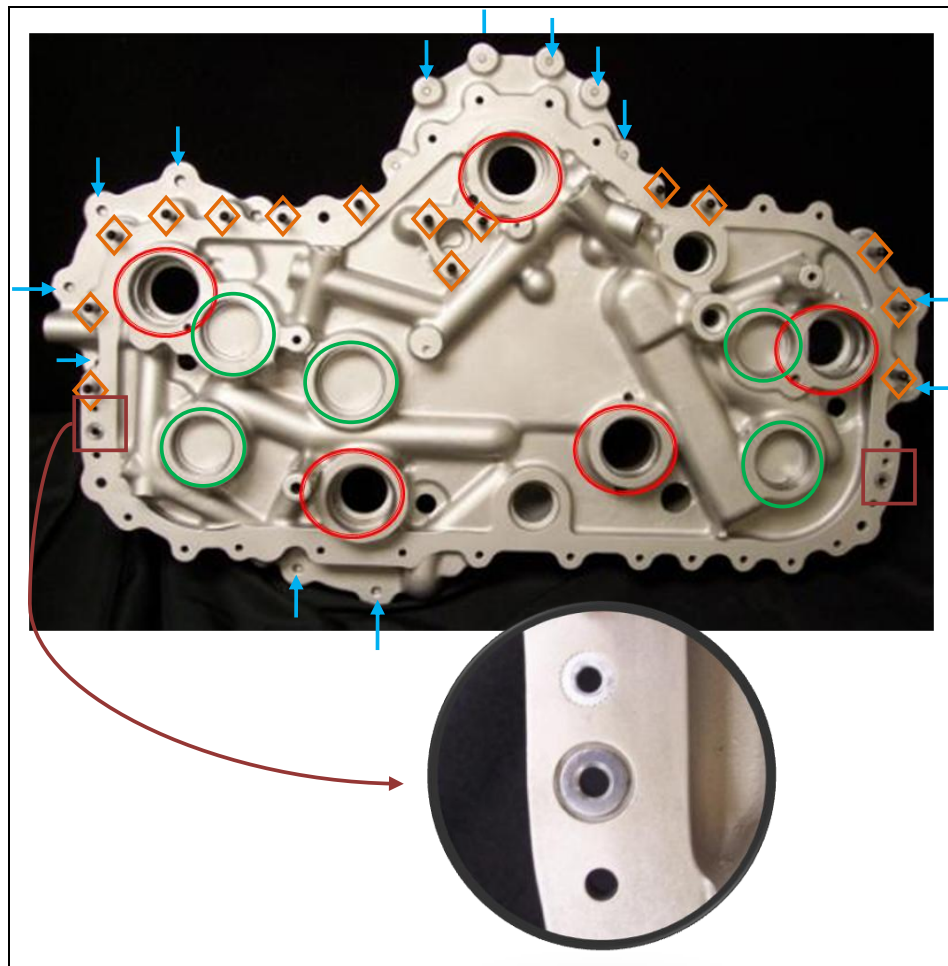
H-47 accessory cover – bottom contains 15 threaded studs, 5 bearing races with through holes, 5 bearing races (enclosed), 13 stud bottoms for UV maskant, and 4 inserts.
